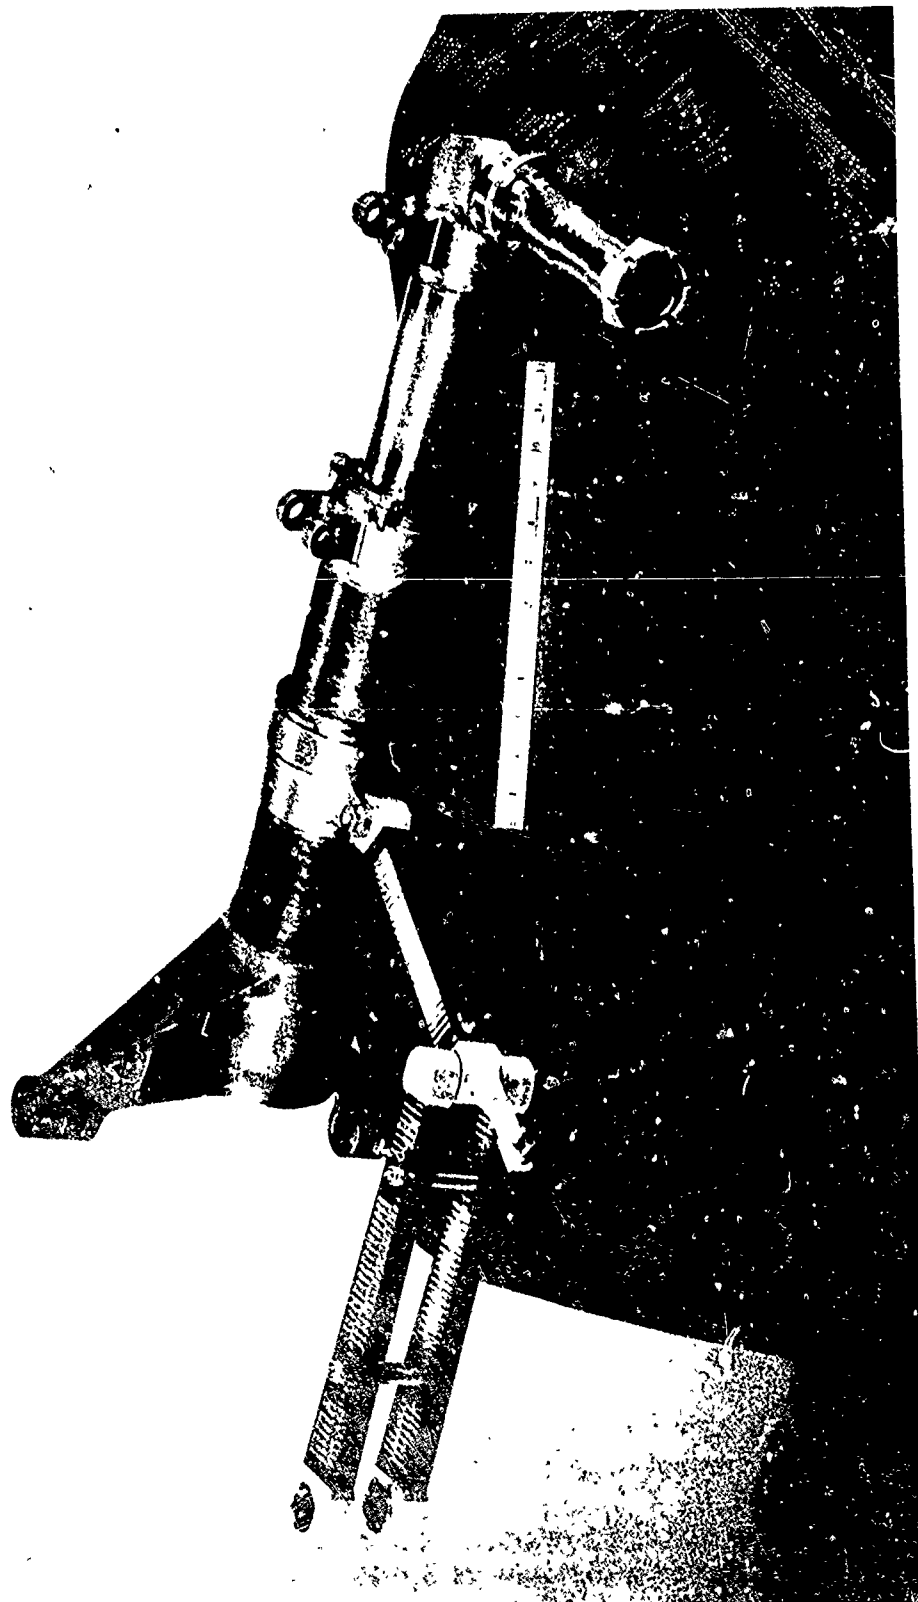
Completed Composite Landing Gear Assembly (P-25150U)
